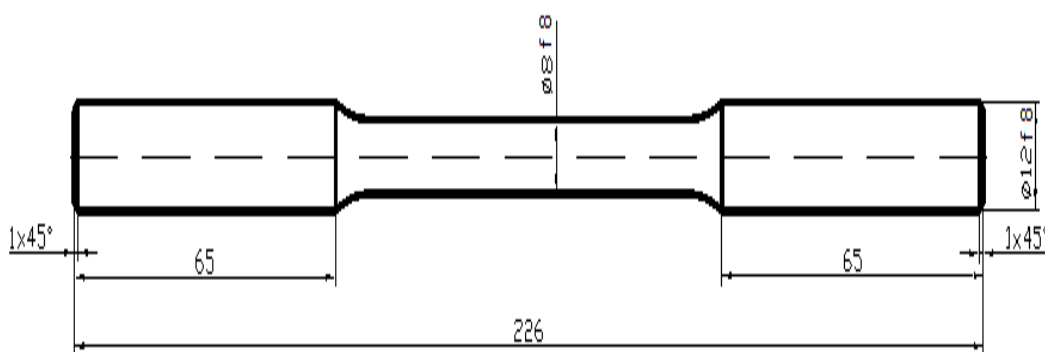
Fatigue specimen geometry (all dimension in mm)
